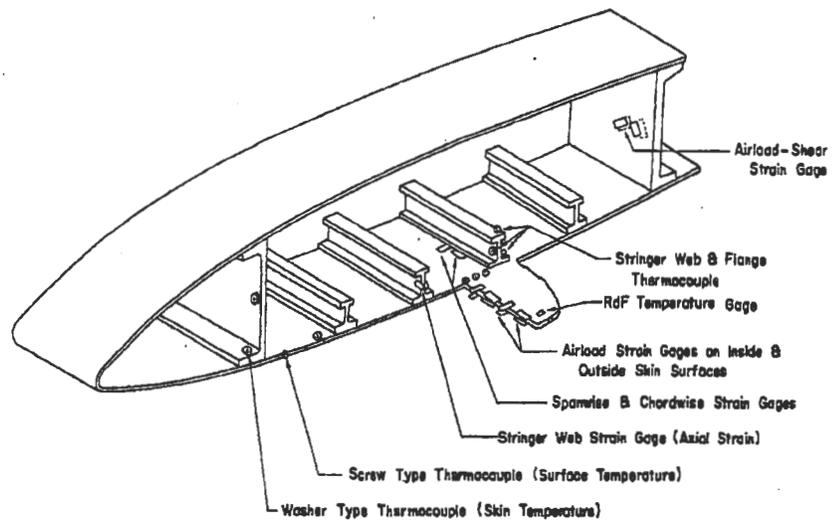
Typical wing section, showing strain gage and thermocouple installations.
